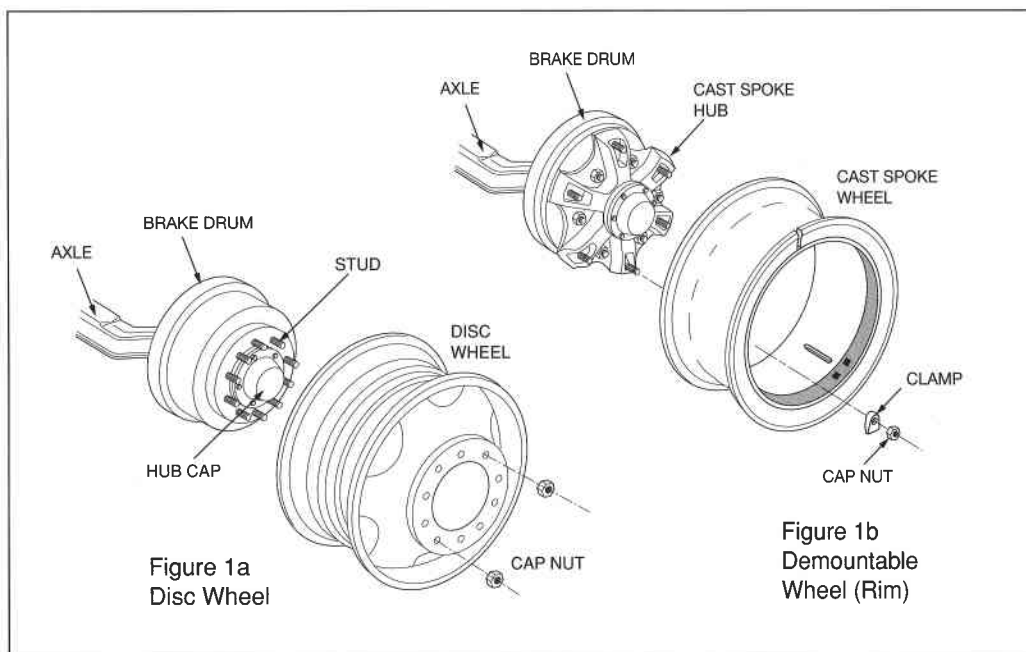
Disc Wheel and Demountable Wheel (Rim)
